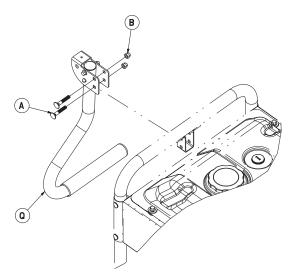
B – Handle Assembly/Foot Assembly (GP2600/GP2800)
